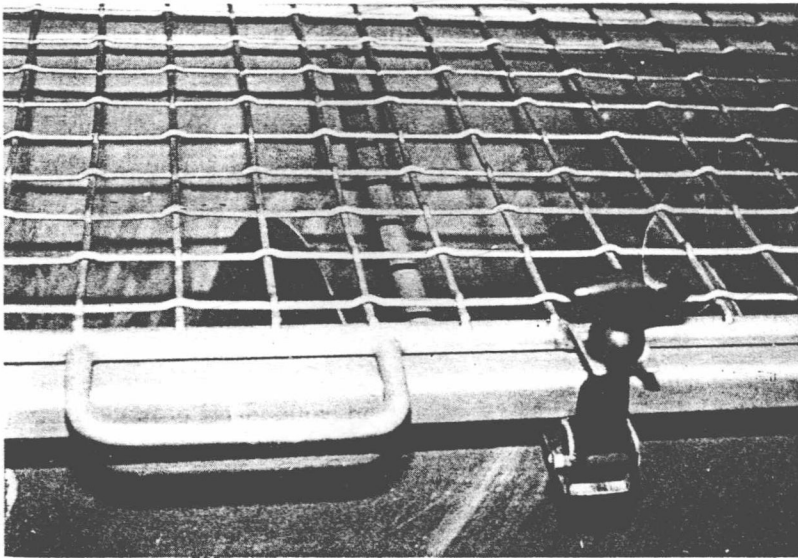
A clamped joint used as a quick release device on a screw conveyor.
